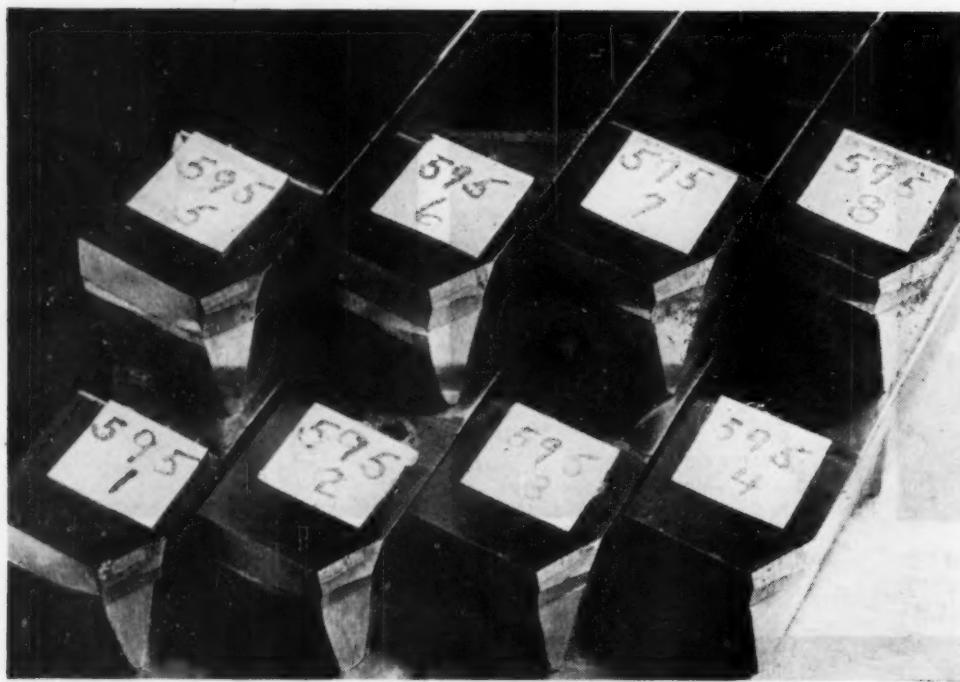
TOOLS FROM EIGHT-TOOTH CUTTER
